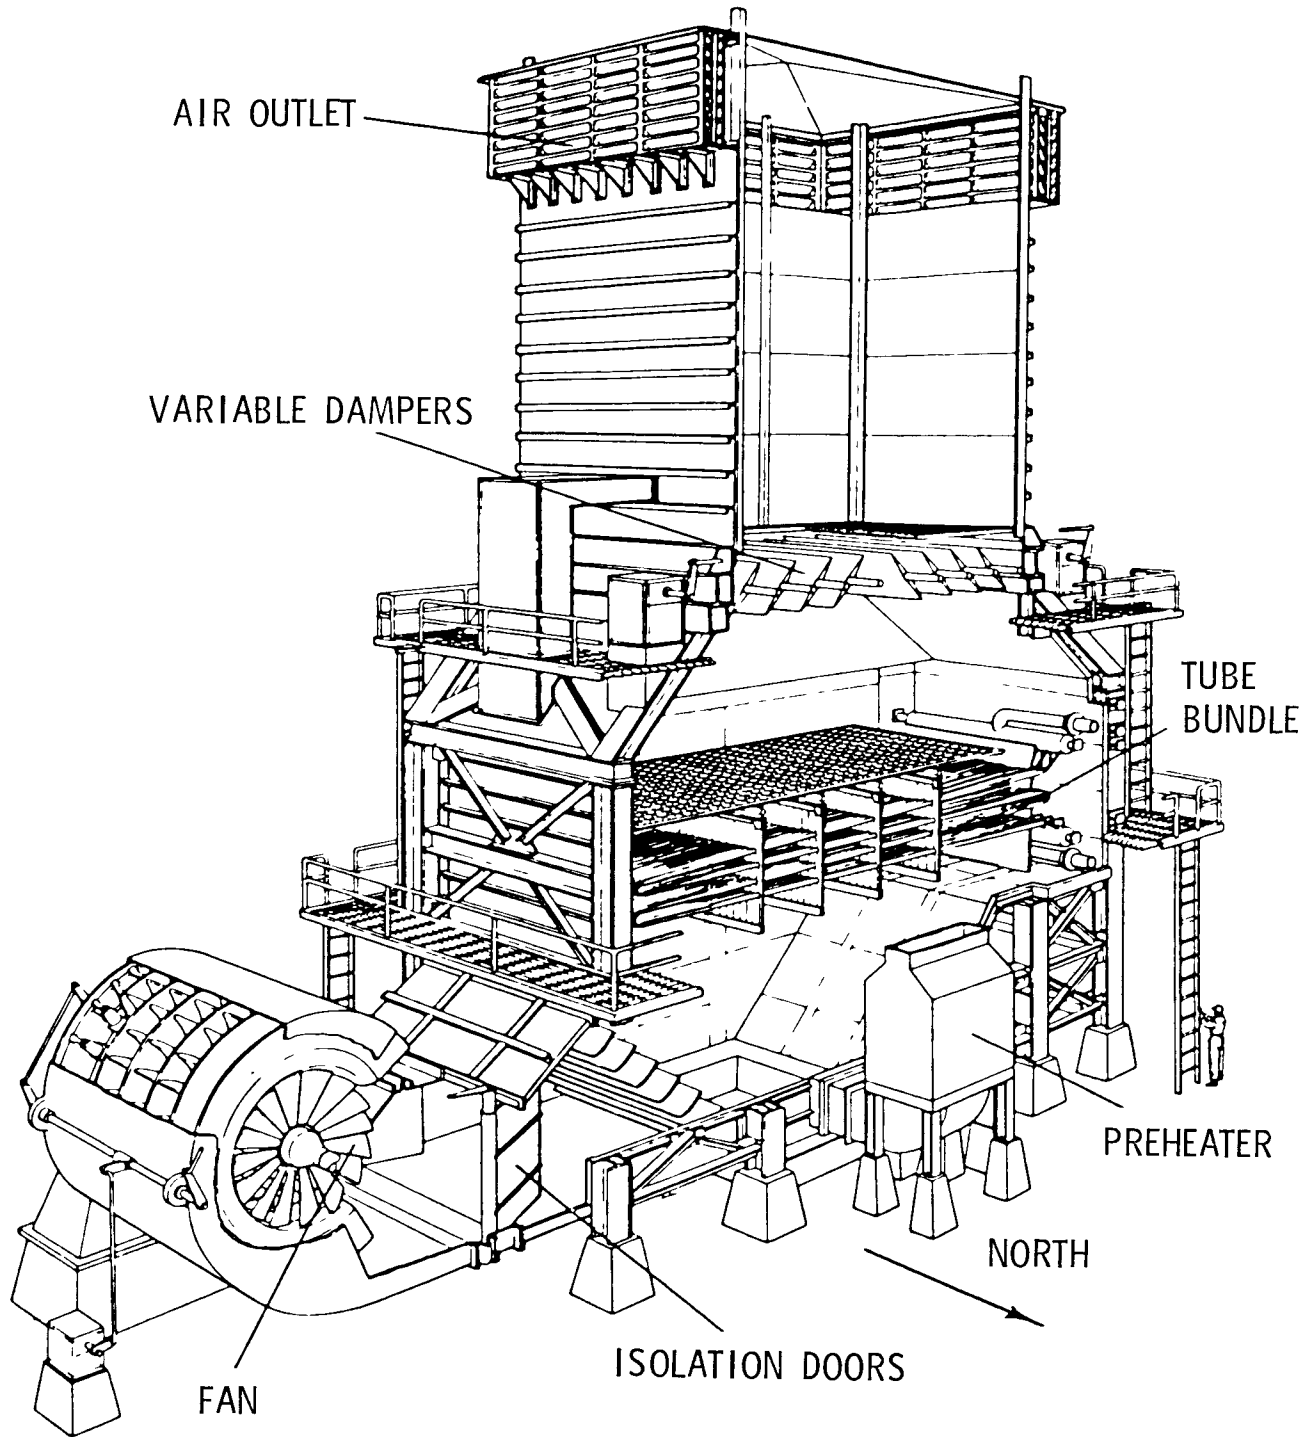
HTS/DHX, 33 MWT Dump Heat Exchanger - Cutaway View
